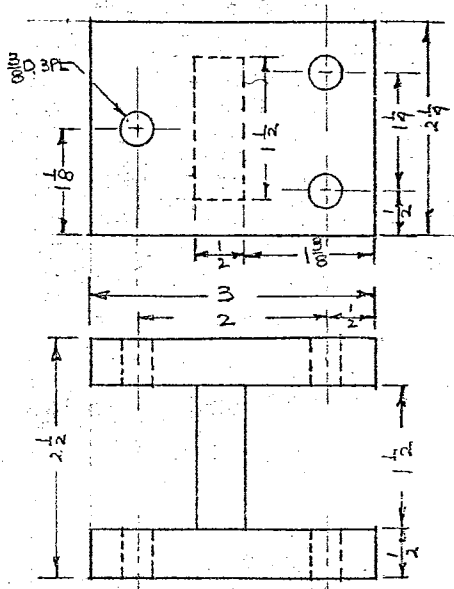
(a). Details of Loading Frame Components - Sheet 1
